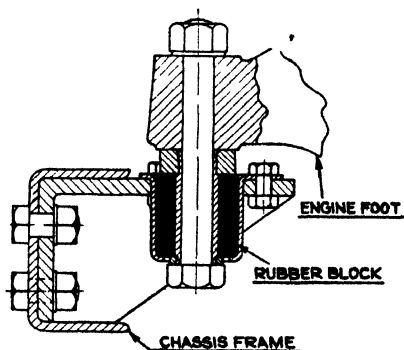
CONCENTRIC TYPE CAR ENGINE MOUNTING
